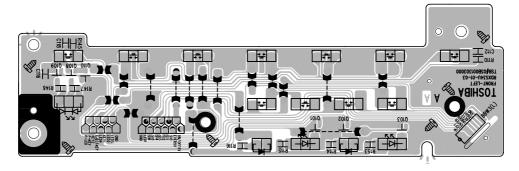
EU03B Front (L) PC Broad (Bottom side)
